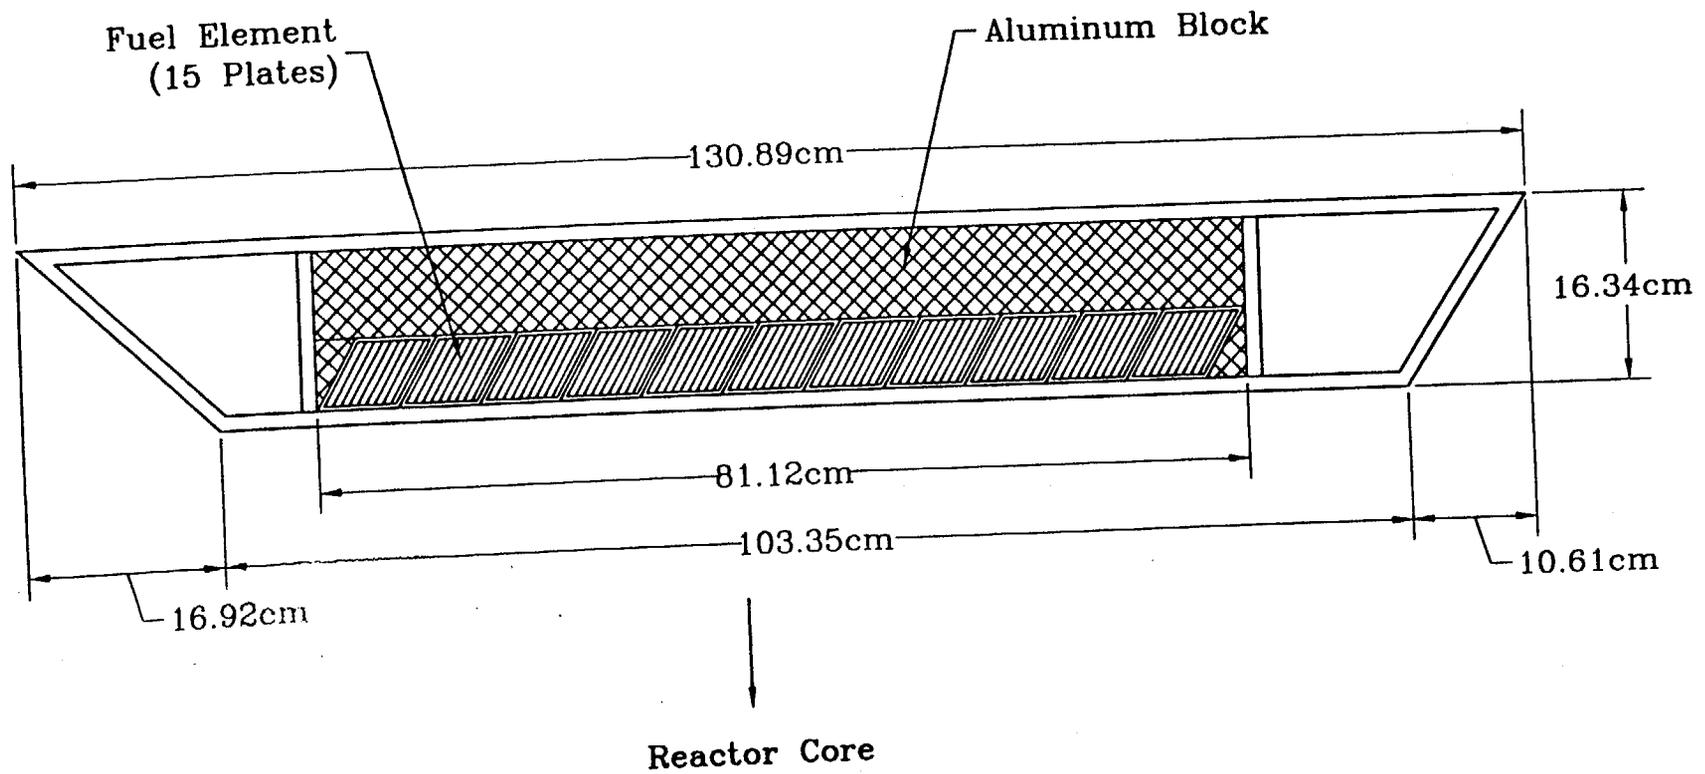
Cross-sectional View of the Fission Converter Tank - Lower Section
